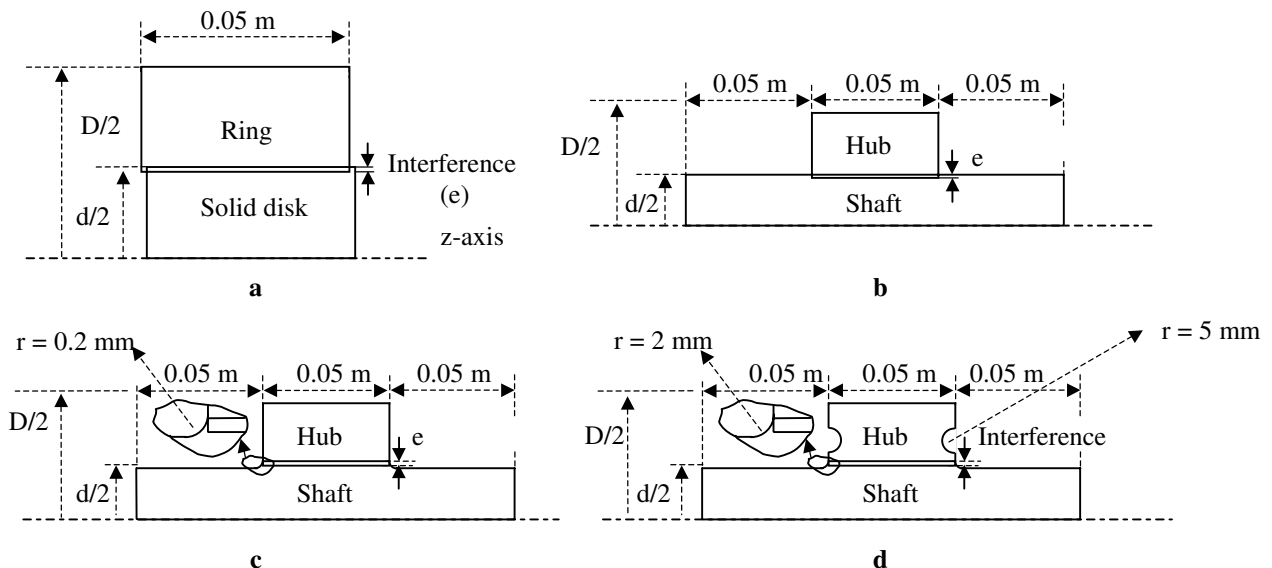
Axisymmetric models of a) Solid disk (shaft) and outer ring (hub), b) Shaft and hub, c) Shaft with shoulder and hub, d) Shaft with shoulder and grooved hub.
